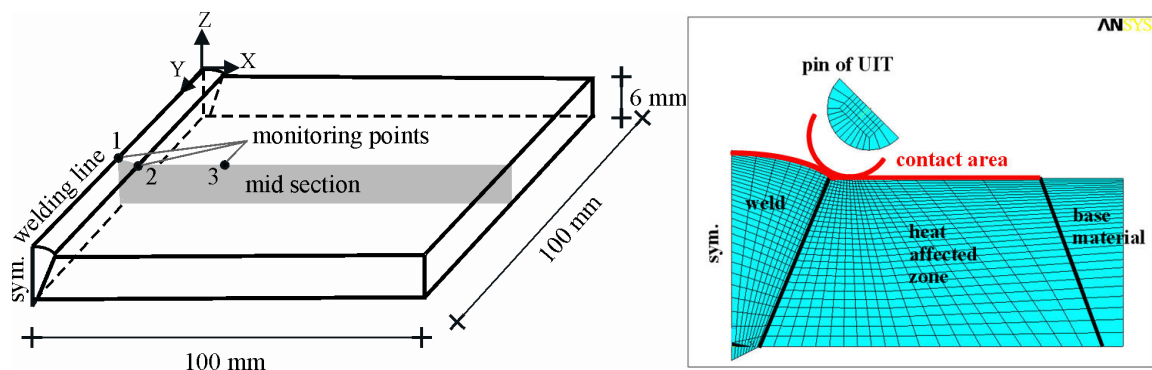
Geometry and FE-model of a steel-plate with a single butt weld.
